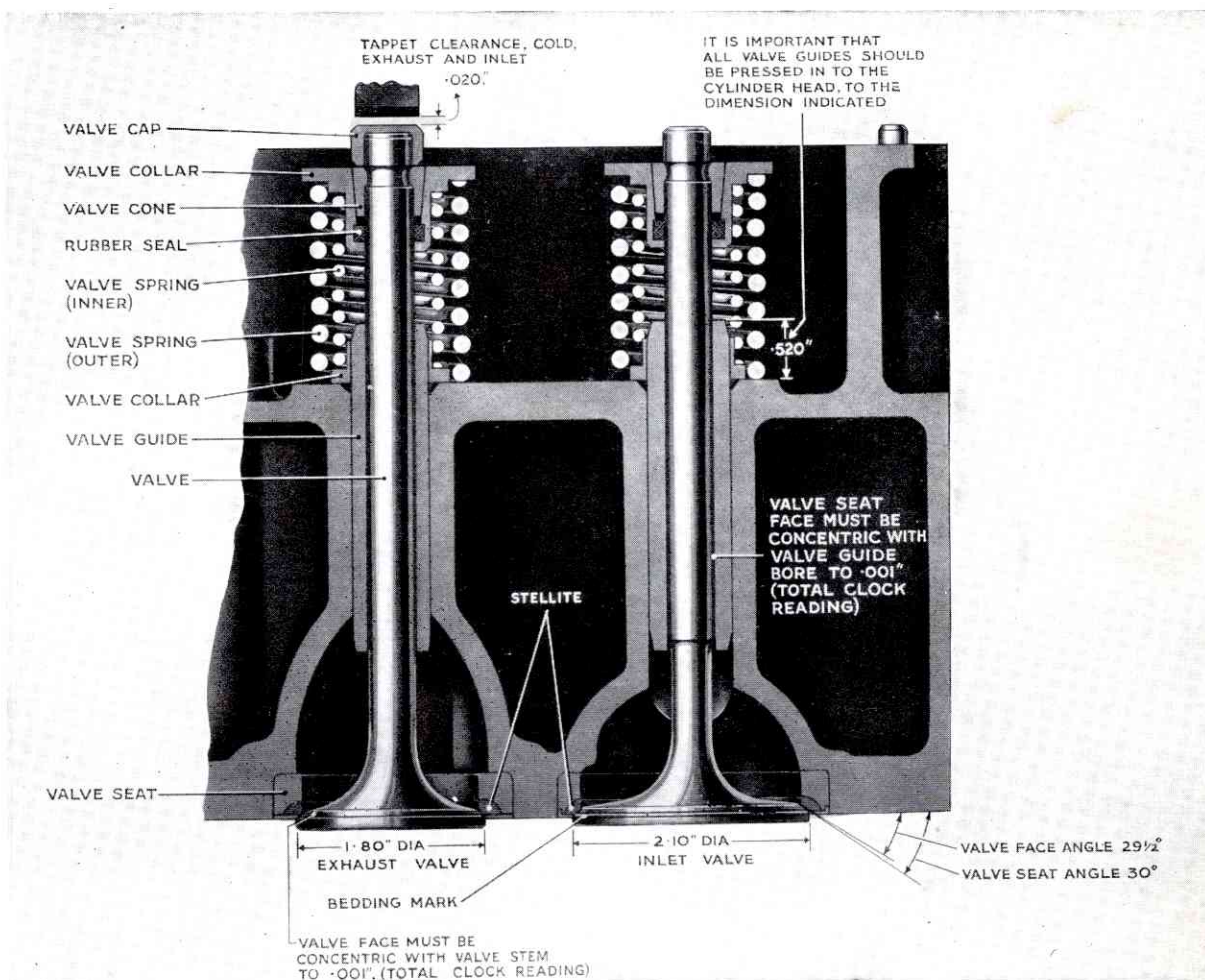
VALVES, SPRINGS AND VALVE SEATS IN POSITION ON 0600 ENGINE
